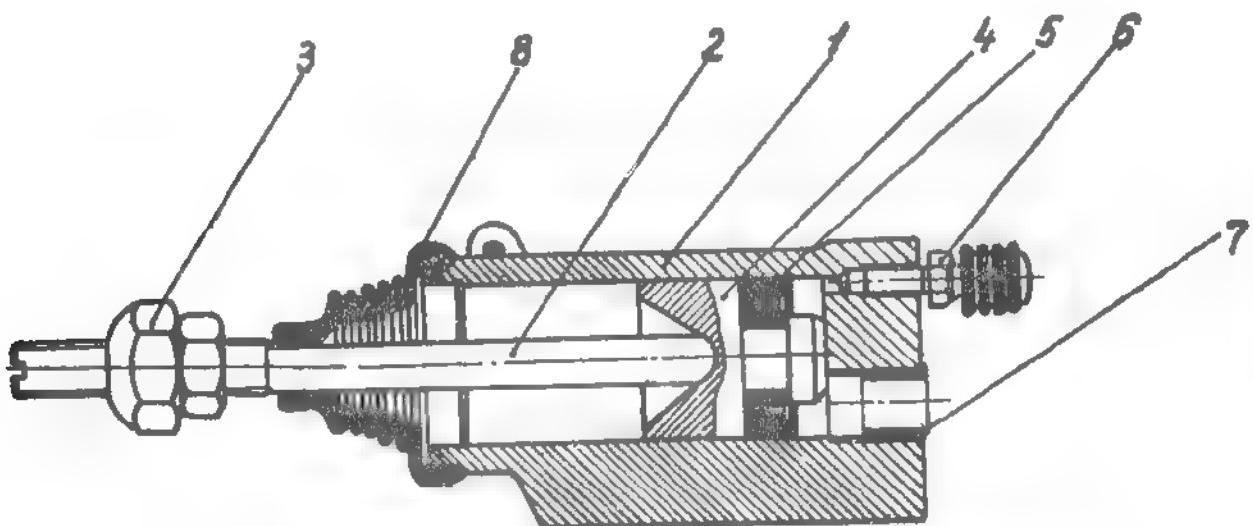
CLUTCH CONTROL CYLINDER.
